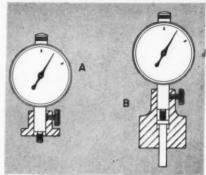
Drawing (A) shows ideal gage for measuring depth of shallow impressions relative to a flat surface. Drawing (B) shows gage for measuring impressions of greater depth than possible with gage shown at (A).
